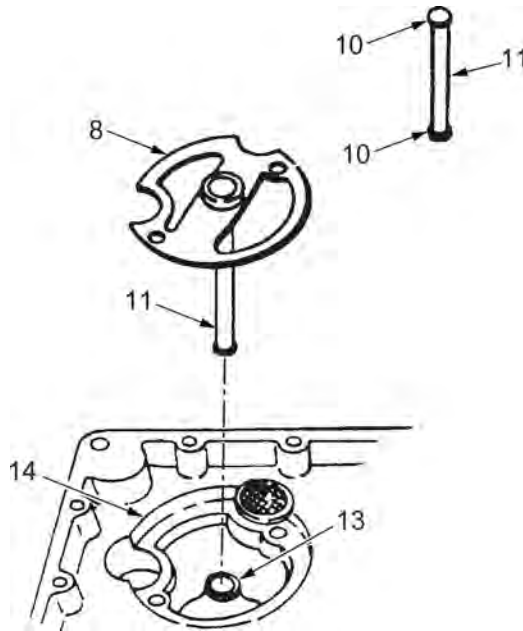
Oil Transfer Tube and Equalizer Valve Diaphragm Installation.
